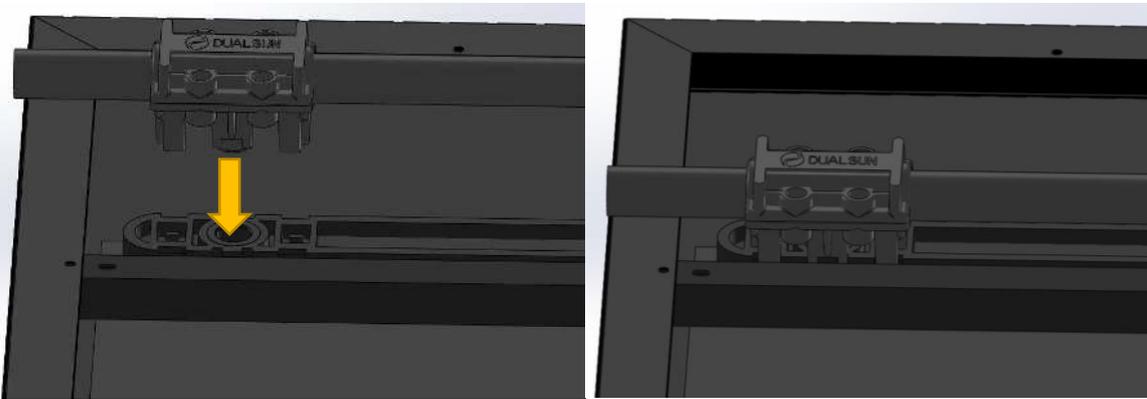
Plugging of the DualQuickfit hydraulic fittings into the Spring Panel collector
